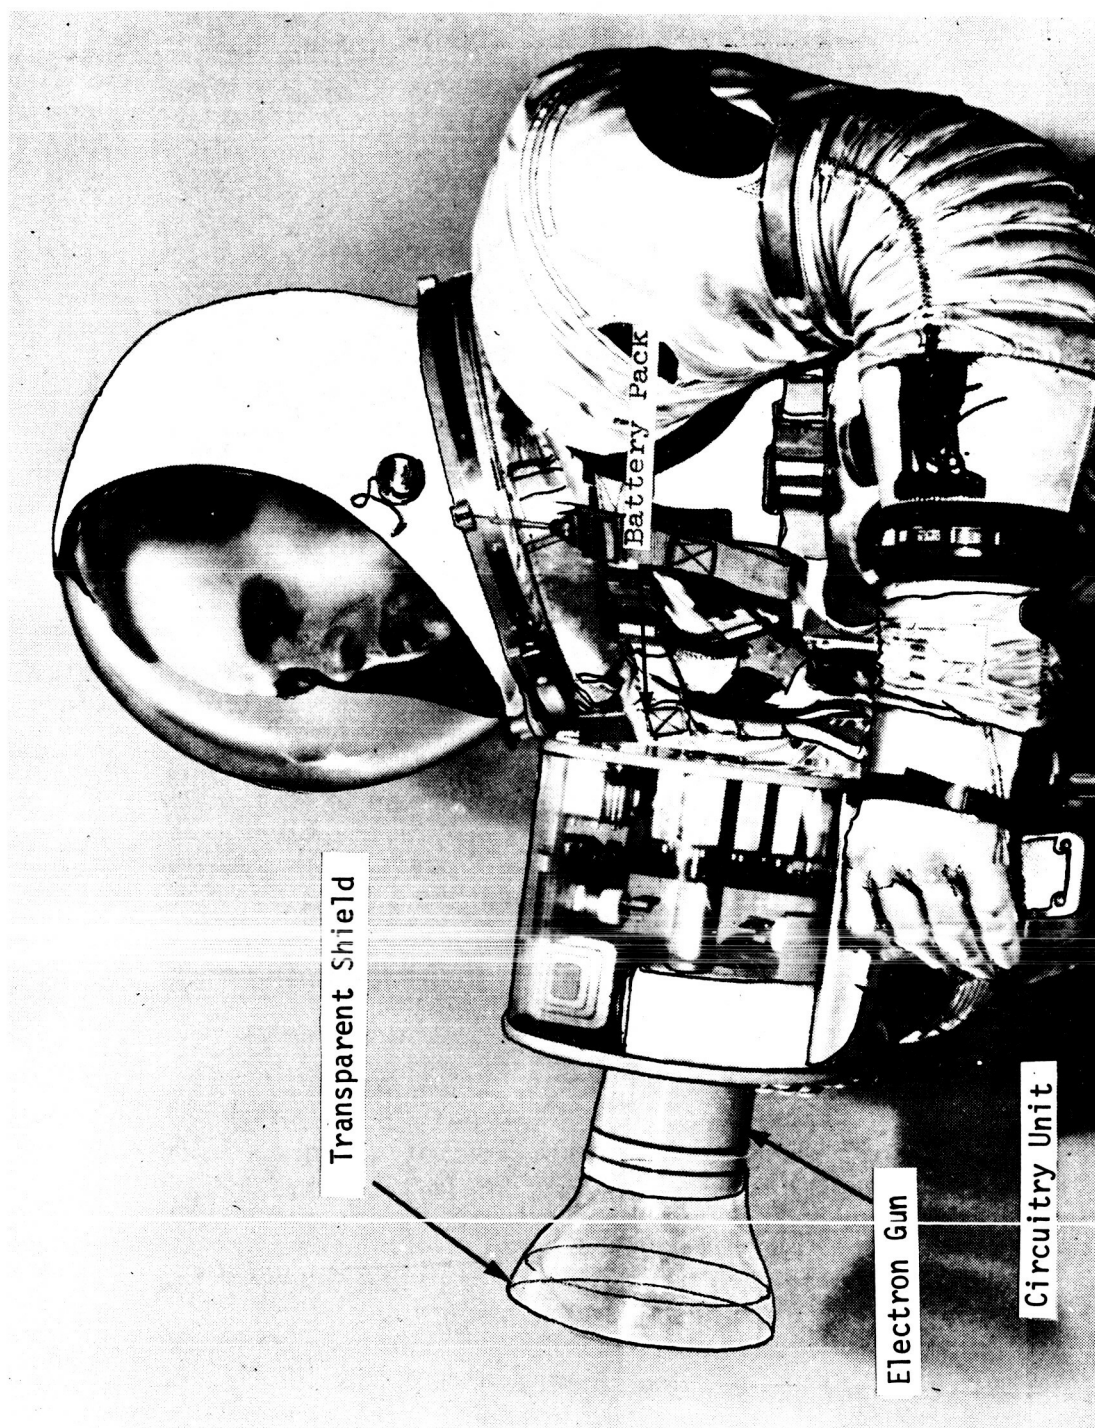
Portable Electron Beam Welder (0.5KW)
